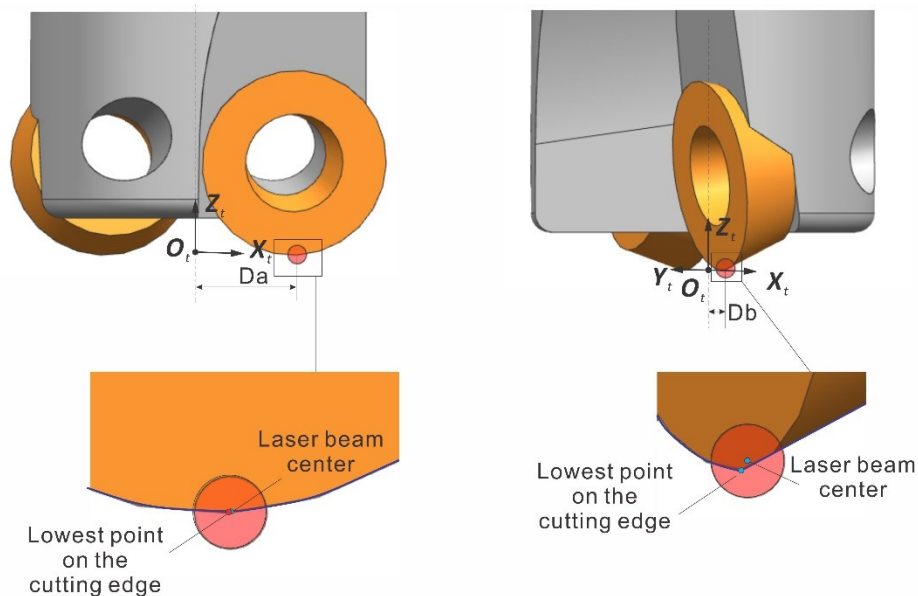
To measure the length of indexable mills with round inserts, the tool should be offset from the laser axis.
